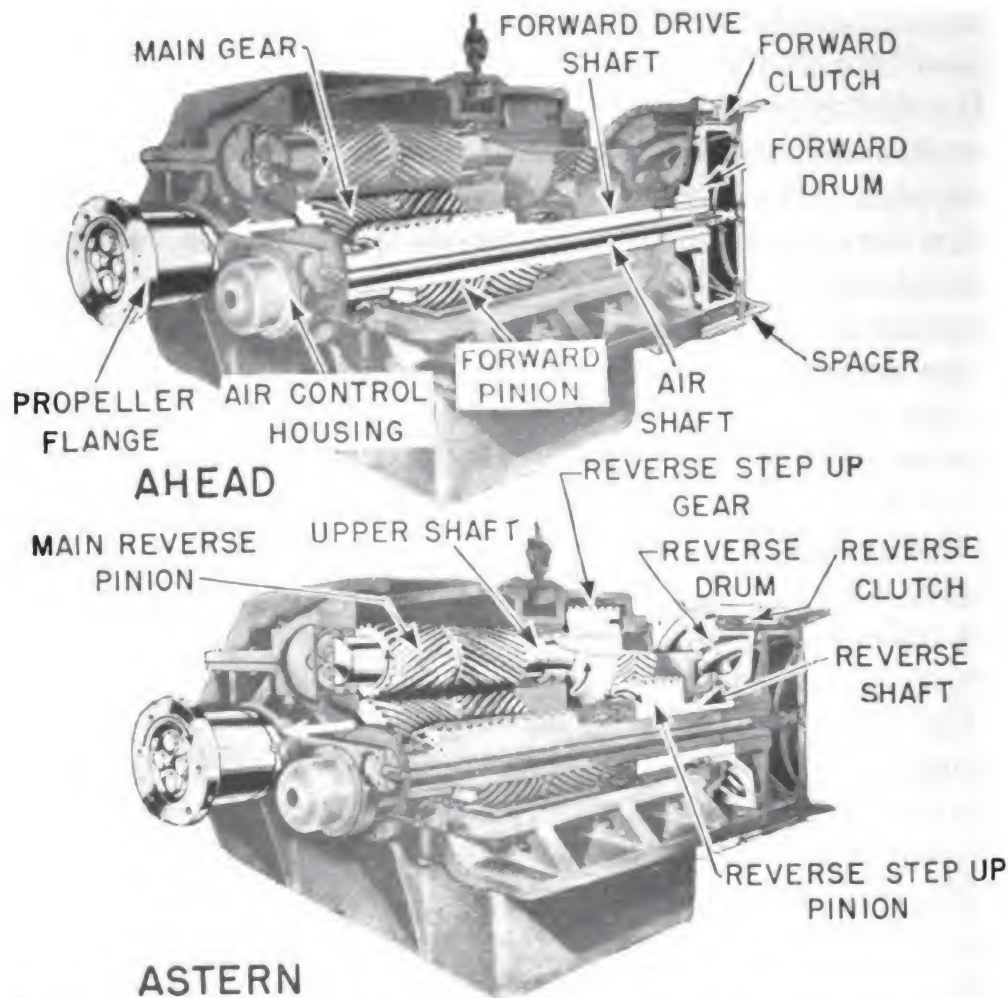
Airflex clutch reverse and reduction gear assembly for General Motors 12-567A engine.
